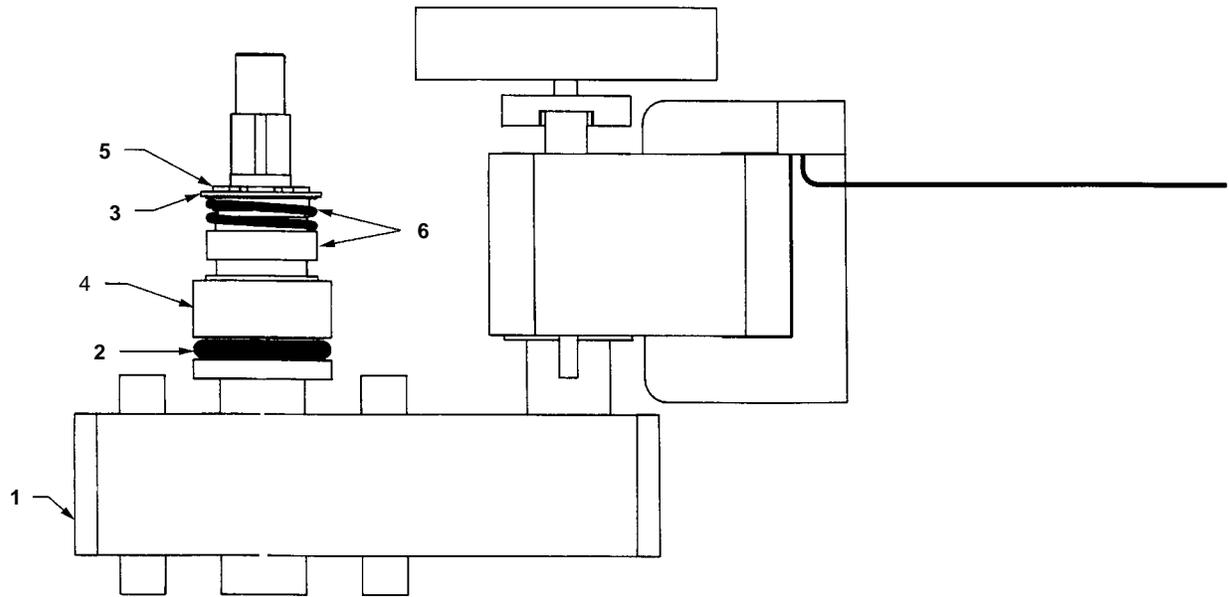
GEAR MOTOR ASSEMBLY AND PART LIST
